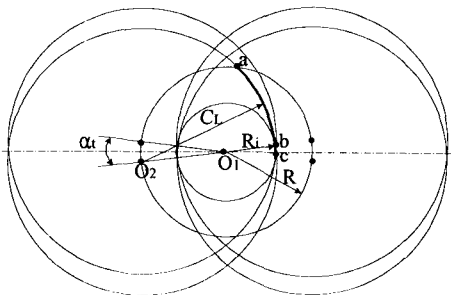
Principle of double flighted screw section drawing in twin screw extruder
